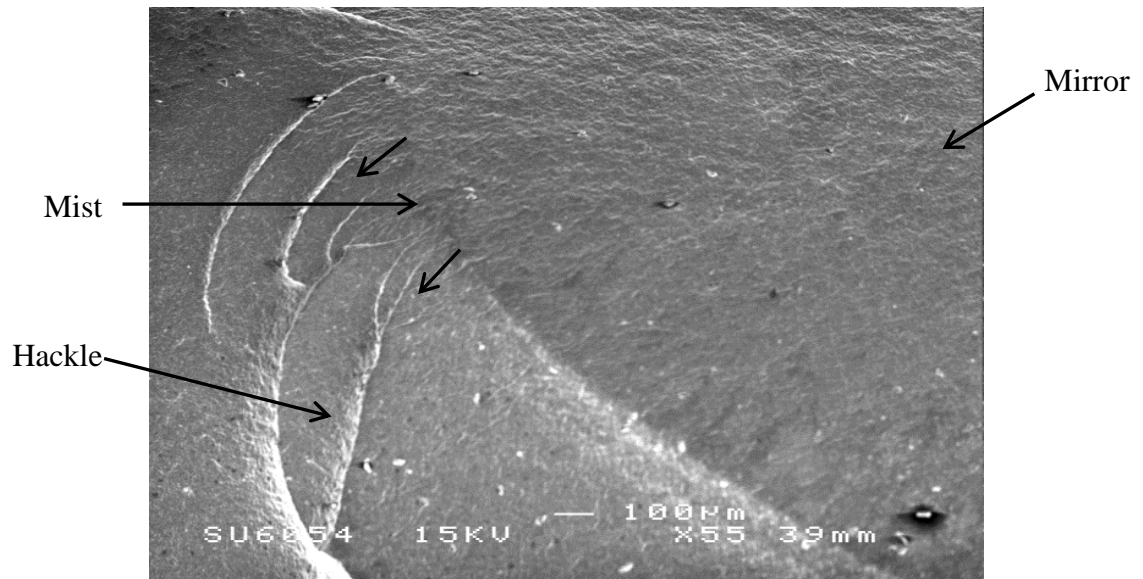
A magnified image showing the mirror, mist and hackle morphology of the fractured surface of O-ring tested in 90 % CO₂.
